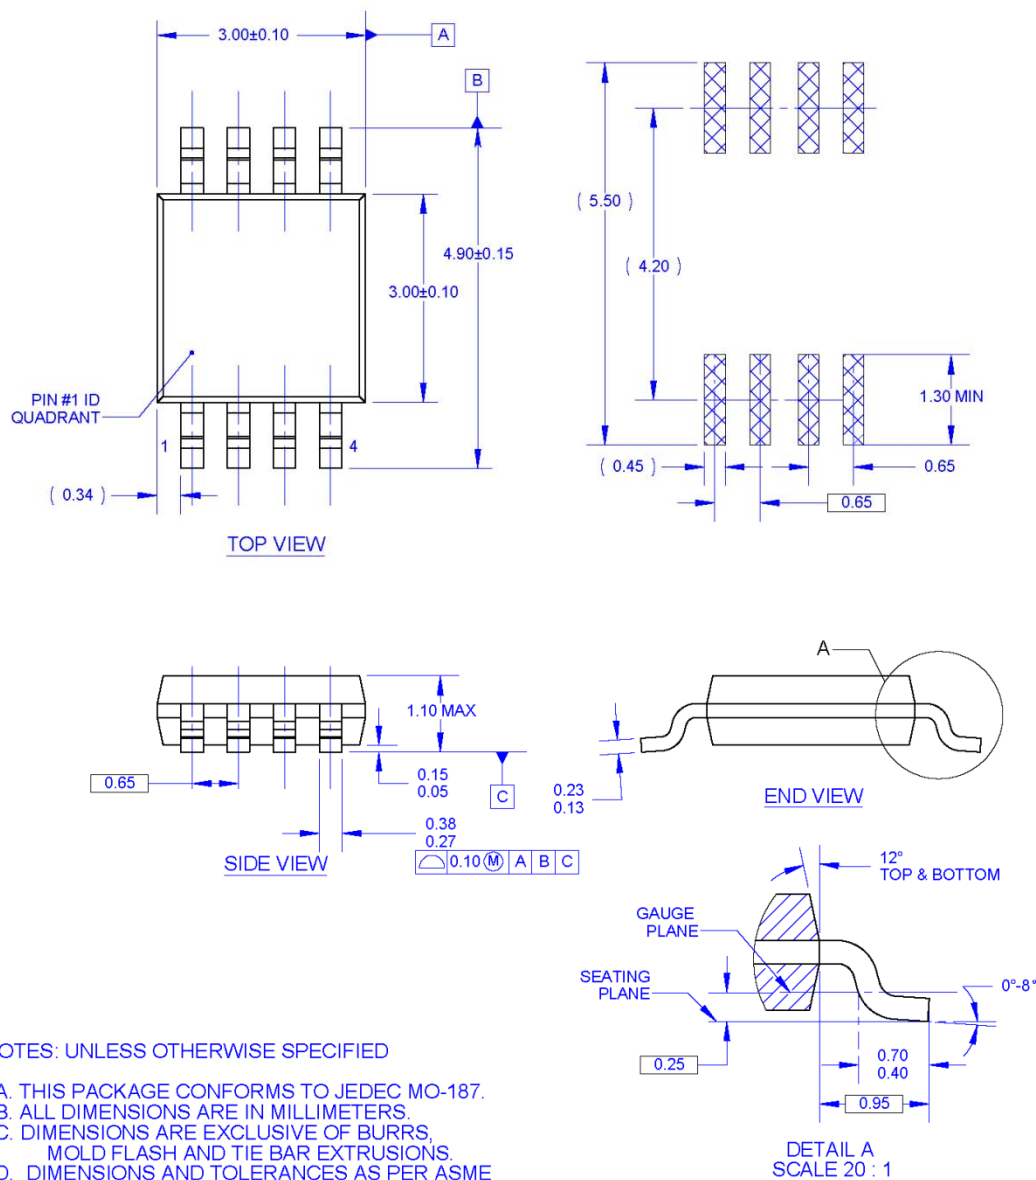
8-Lead, Molded Small-Outline Package (MSOP)
